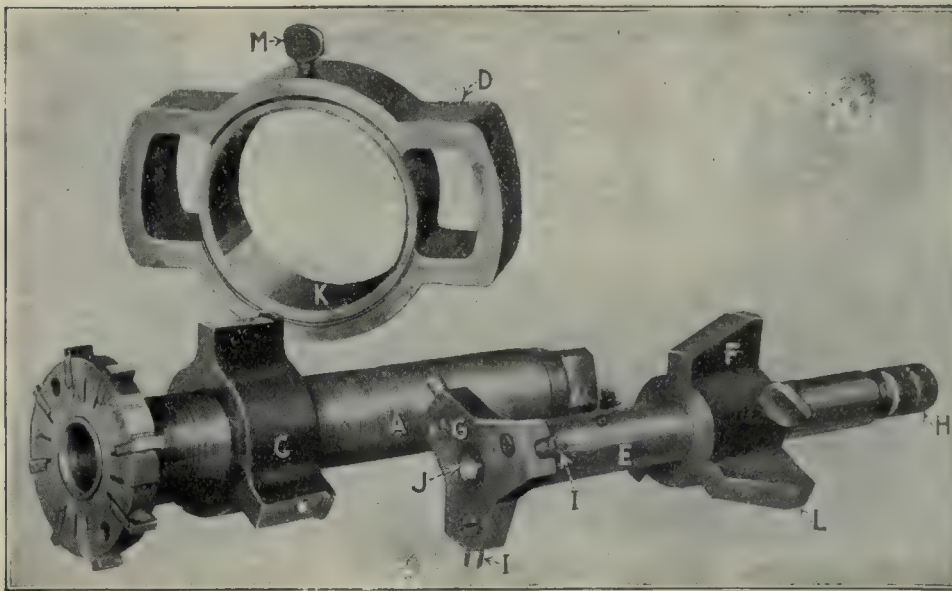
THE DETAILS OF THE CYLINDER-REBORING MACHINE
